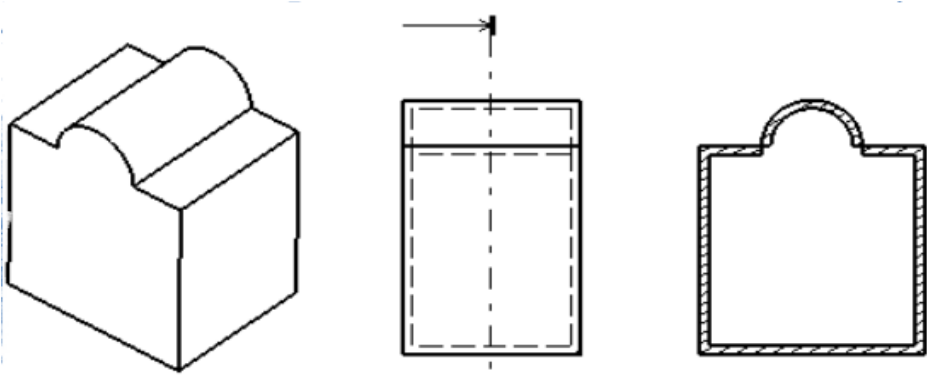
3D hollow solid part views (Isometric view, View from side, Section Cut view)
